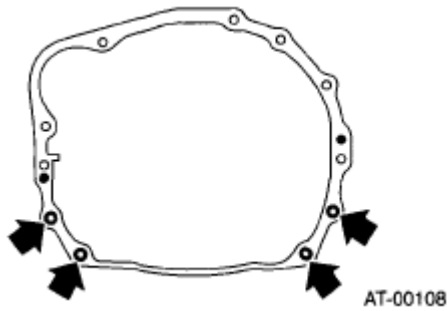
Locating Bolts And Nuts Which Hold Lower Side Of Transmission To Engine - AT Model
